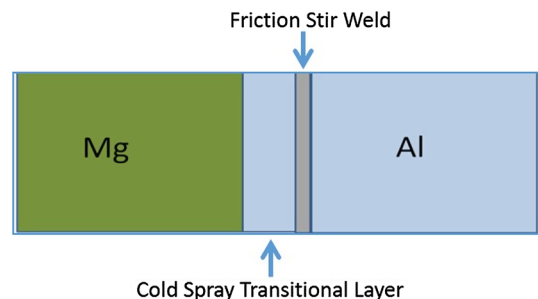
A schematic of how the samples were prepared to enable cast ZE41A Mg to be joined to wrought 6061 Al by a combination of the cold spray process and friction-stir welding is shown
